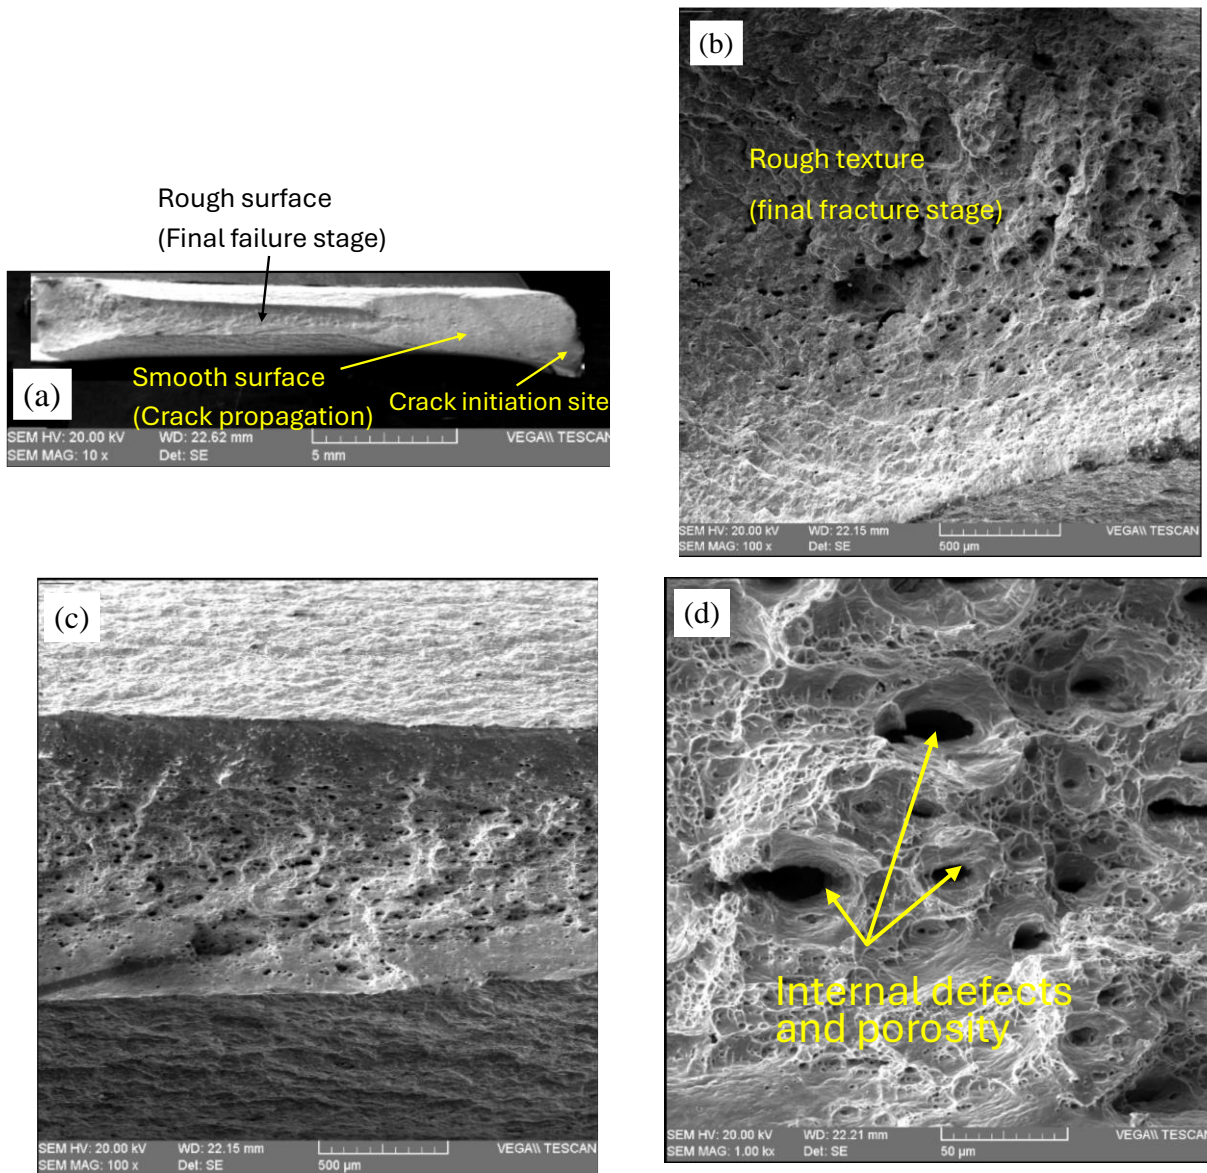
SEM images of the fracture surface of the Inconel 600 under cyclic loading
